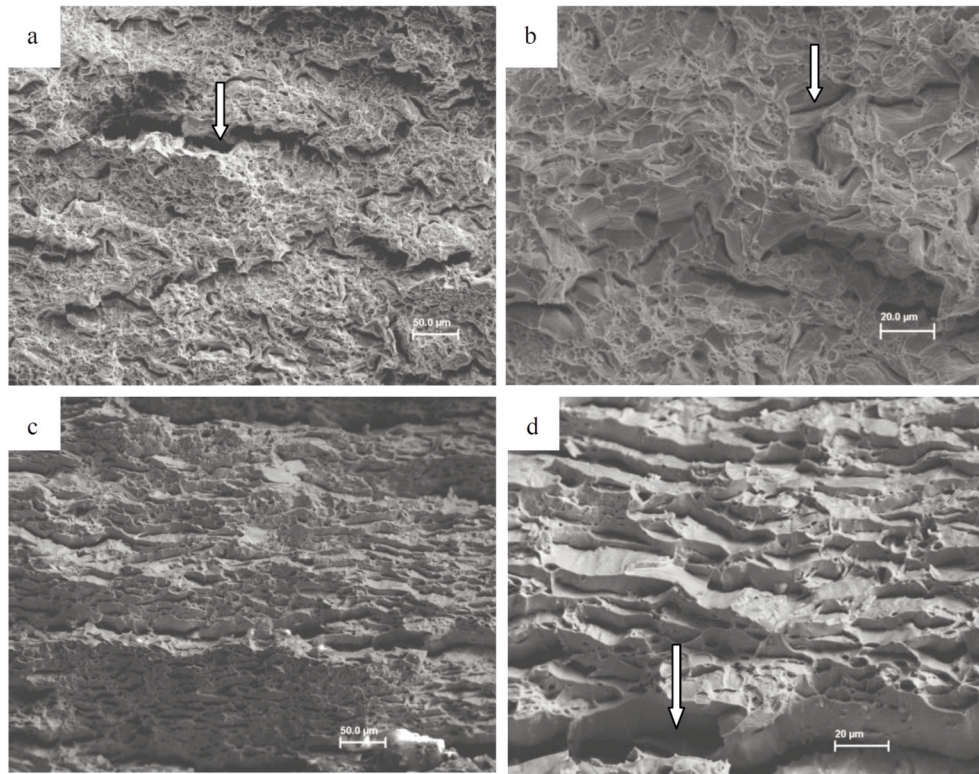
Fractographs after tensile test in lower and higher magnification of as received G11 (a & b) reveal primarily dimple fracture and G12 (c & d) reveal cleavage rupture with some dimples.
